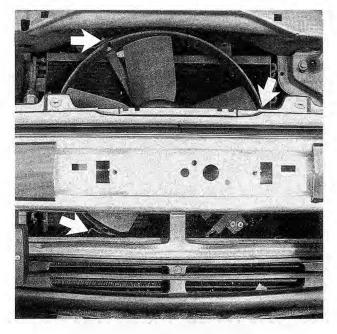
Auxiliary cooling fan mounting nuts (arrows).
